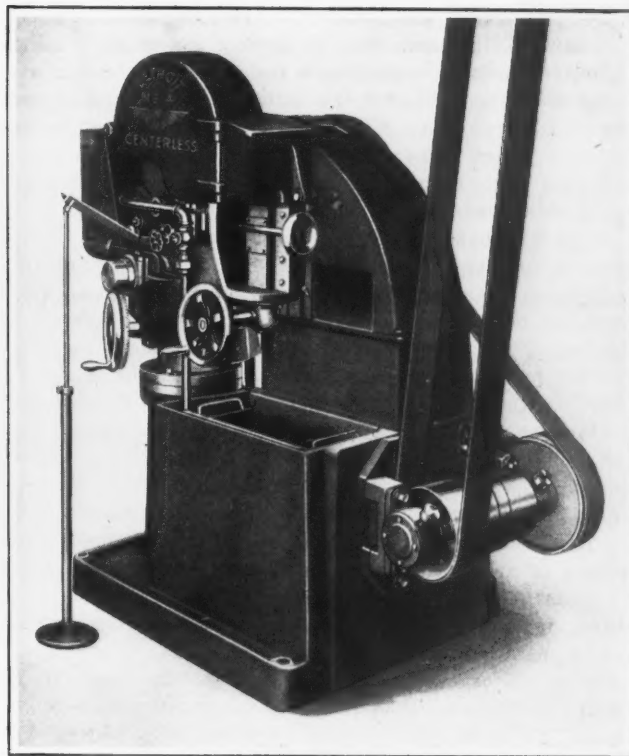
Operating Side of the Detroit Heavy-duty Centerless Grinding Machine
